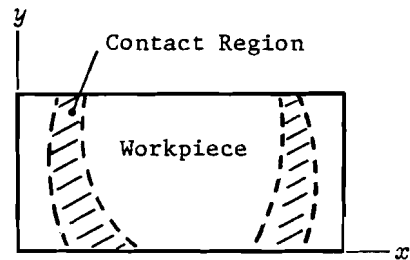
Illustrated view of contact between workpiece and electric-magnetic chuck
